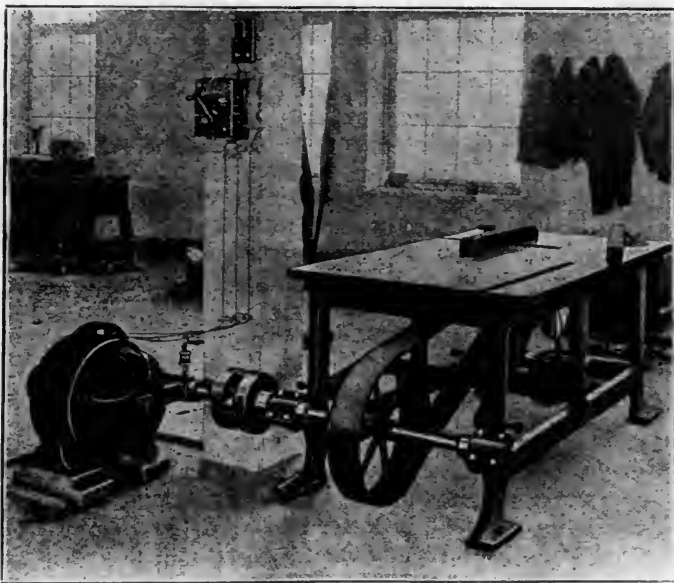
A 12-INCH RIP SAW WITH A DIRECT-COUPLED DRIVE FROM A 10-H. P. BACK-GEARED MOTOR.
